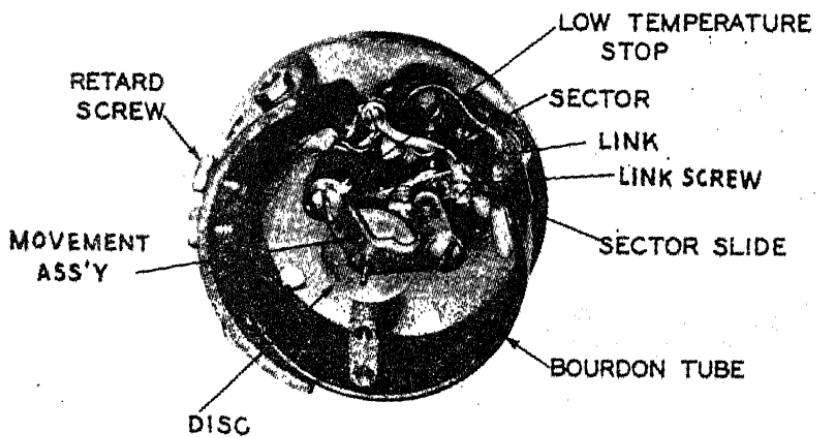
Mechanism of Ashcroft Carburetor Air Thermometer
